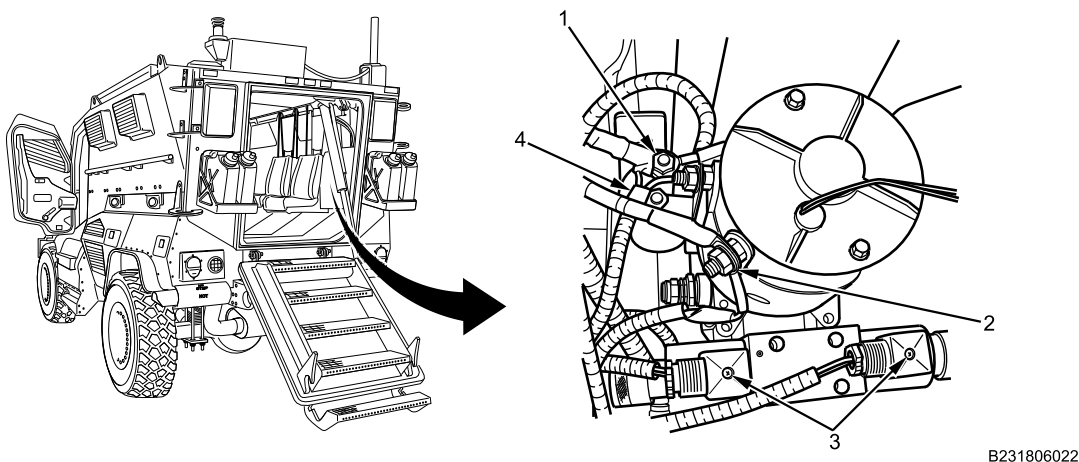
Hydraulic Pump and Valve Assembly Electrical Connections.
